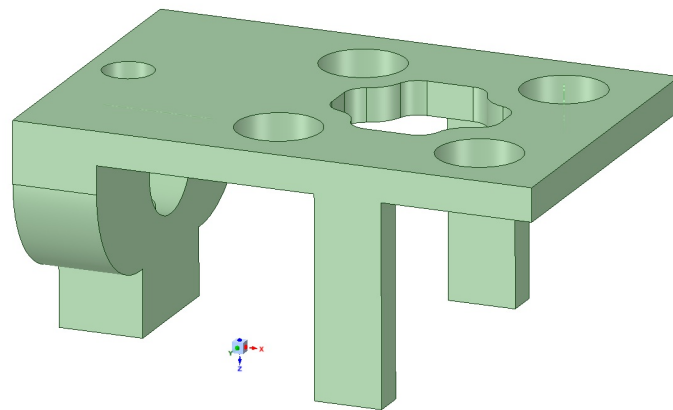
Schematic of sample chamber stand designed for packing the samples and mounting the sample chambers on the cryostat inserts.
